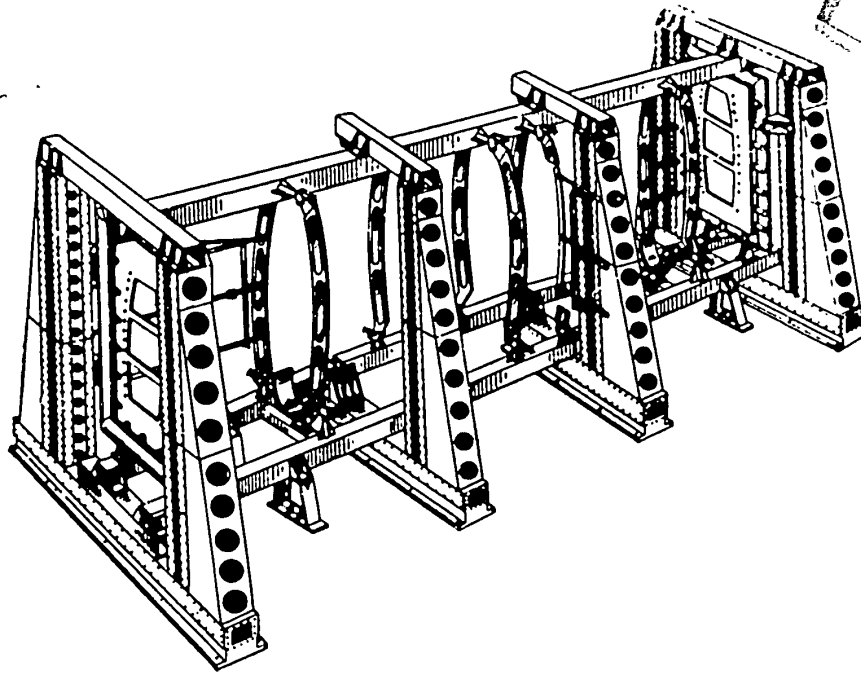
Jig Made of Standardized Components for the Assembly of Wing Center Sections
